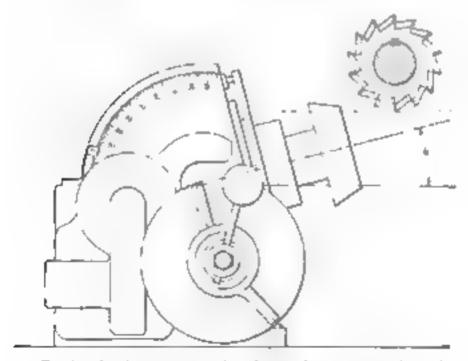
Dividing head set at angle of 15 degrees for cutting teeth in 70-degree angle cutter blank with a 60-degree cutter
